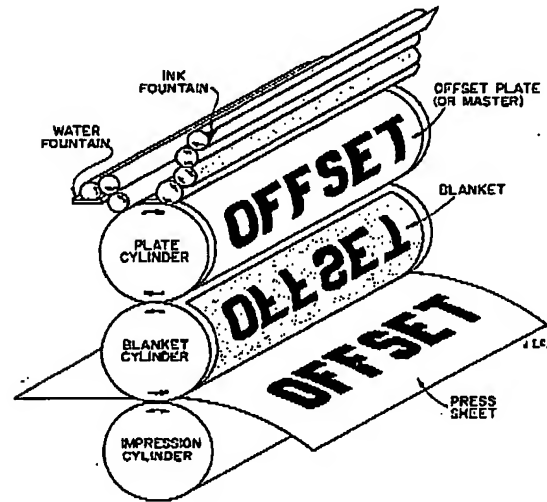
Schematic Drawing of an Offset Press; from Plate, to Blanket, to Paper.
